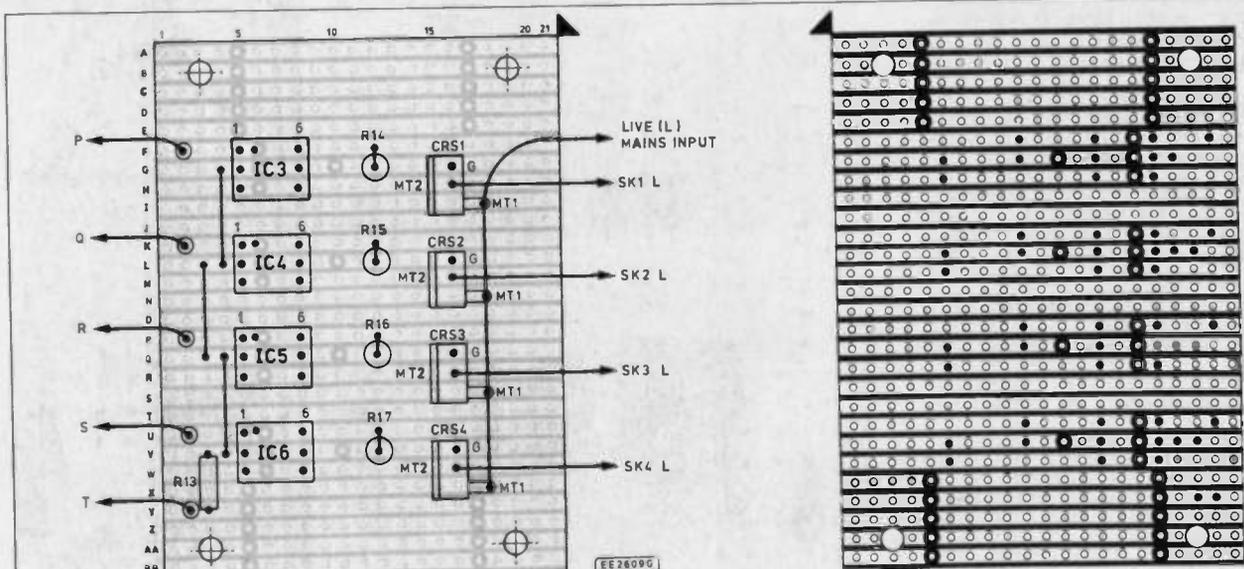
Triac stripboard component layout and details of breaks in the underside copper tracks.
